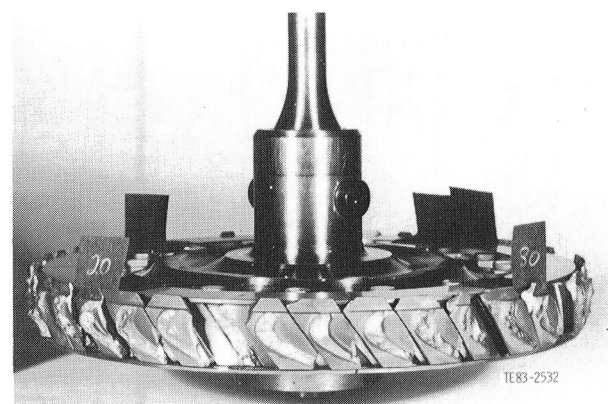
Gasifier turbine rotor C-4, TD14, blades No. 20 through 30 of 40 total.
